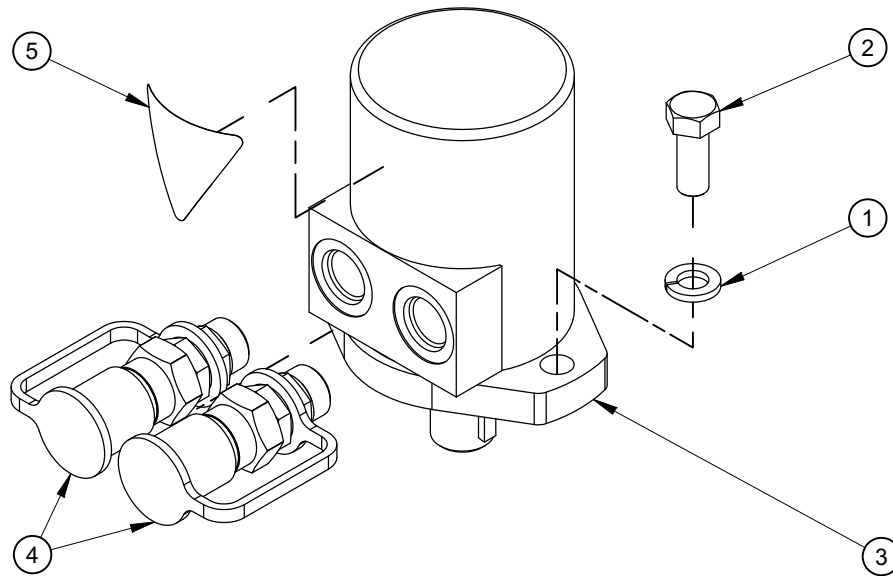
RDU 2ND GEN ASSEMBLY (P/N 53912)
